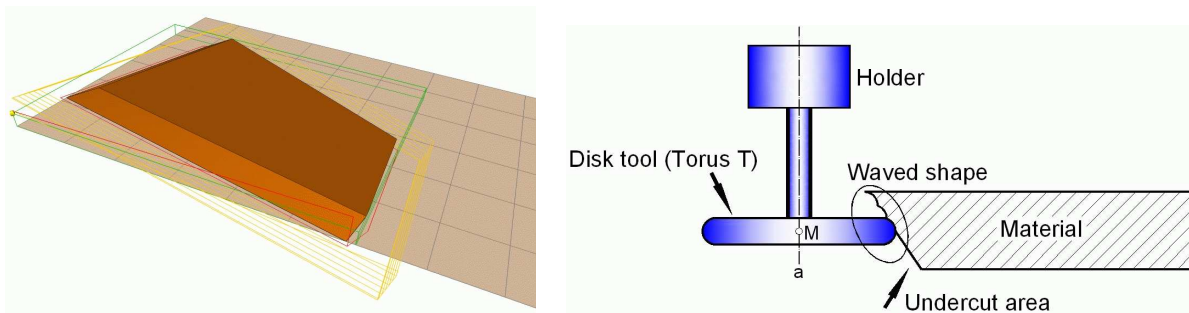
A panel and its milling paths (left). A disk tool can mill an undercut (right)
